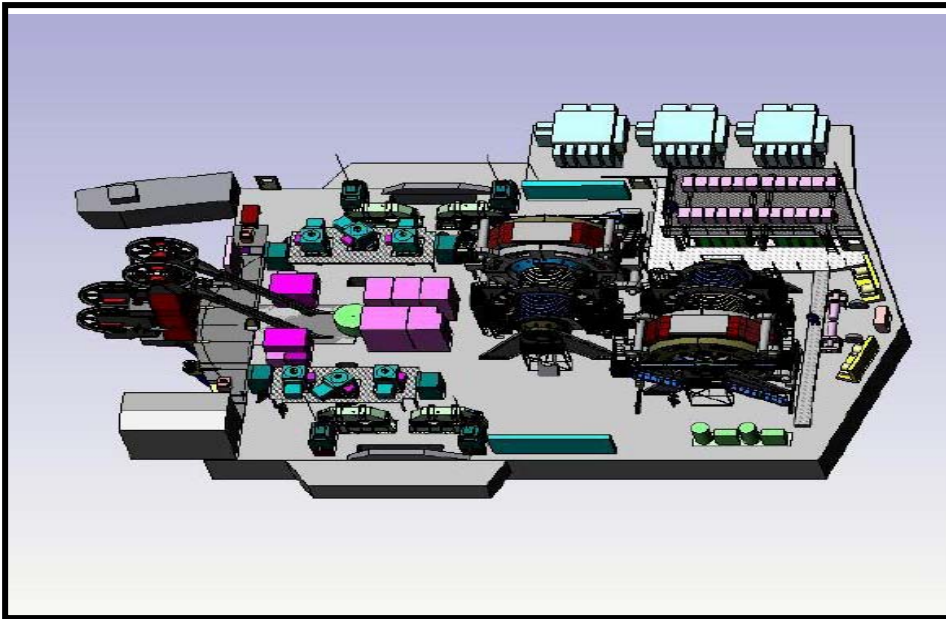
Machinery Layout 8750 Dragline with Gearless Hoist/Drag
